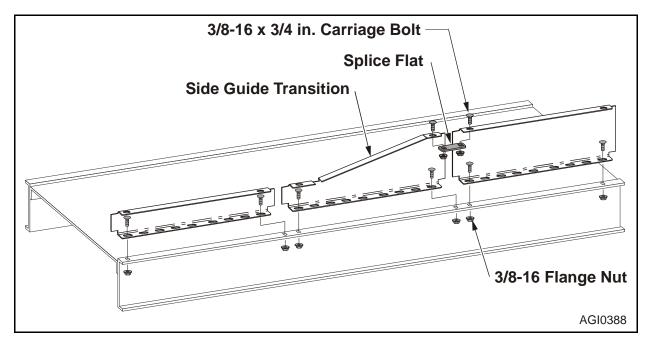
77 Direct-Mounting Side Guide Transitions Mid-Conveyor
